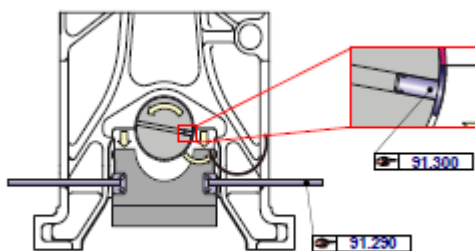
Lower the bearing cap and mount the fitting plug (베어링 캡의 언착 및 피팅 플러그의 설치)
